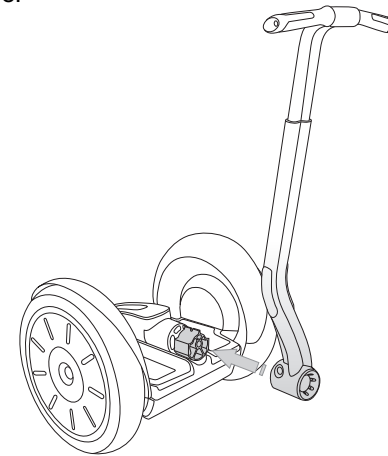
Attaching the LeanSteer Frame from the Pivot Base Assembly
